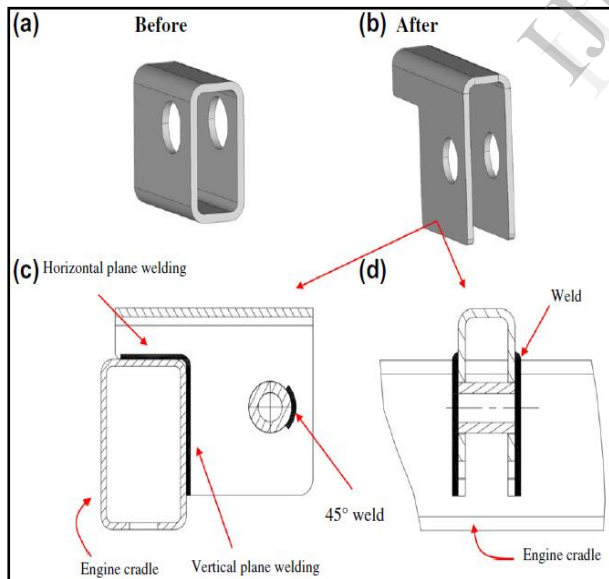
(a) Old design of the bracket (b) 'L' type new design of the bracket (c) Side view: line diagram for the new 'L' type bracket design (d) rear view [3].
